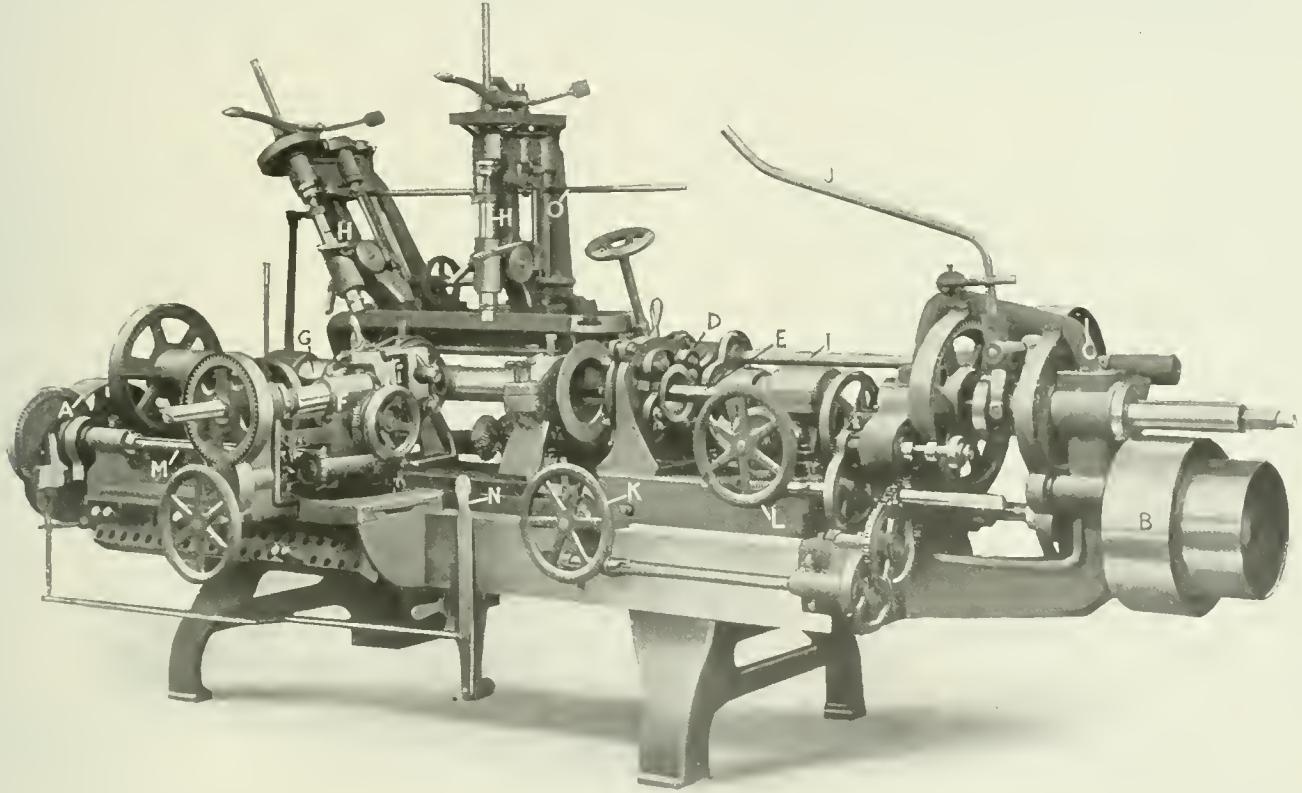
Special Machine for Machining Force Pump Casting shown in Fig. 2
